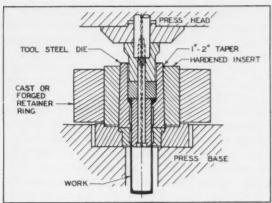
Typical tooling set-up for forward extrusion. A relief hole is provided through the punch assembly to permit air to enter the extending work-piece cavity.
